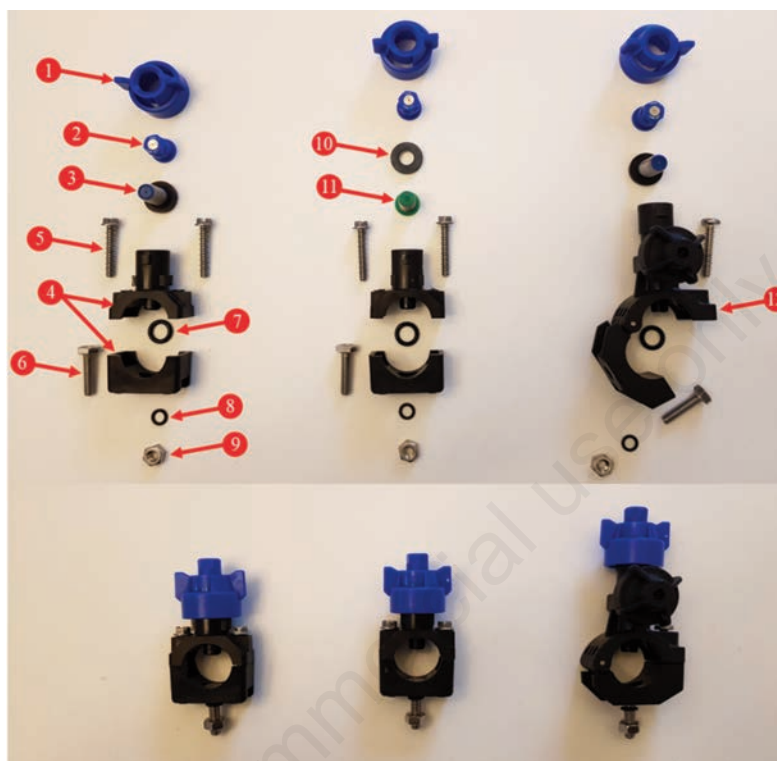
Exploded and assembled views of the TX-VS1 nozzle assemblies: among the 3 tested check valve configurations, the left assembly has no check valve, the middle assembly has a 10 psi Ball Check Valve, the right assembly has a 10 psi Diaphragm Check Valve. 1, cap; 2, nozzle; 3, strainer, integrated gasket; 4, nozzle body parts; 5, self tapping screw, clamps nozzle bodies; 6, bolt, fastens nozzle body to floor; 7, O-ring, nozzle body shank – pipe; 8, O-ring, nozzle body – floor; 9, nut; 10, gasket, cap; 11, strainer, 10psi ball check valve; 12, nozzle body, 10 psi diaphragm check valve.
